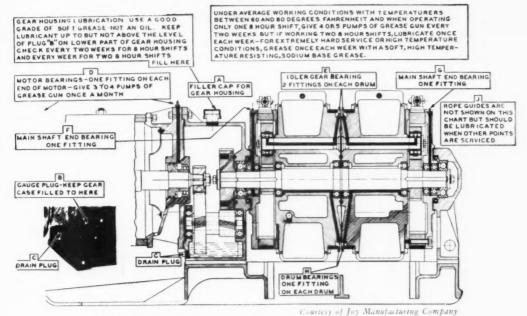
Lubrication chart for a Sullivan double drum scraper hauler with foot mounted type motor.
